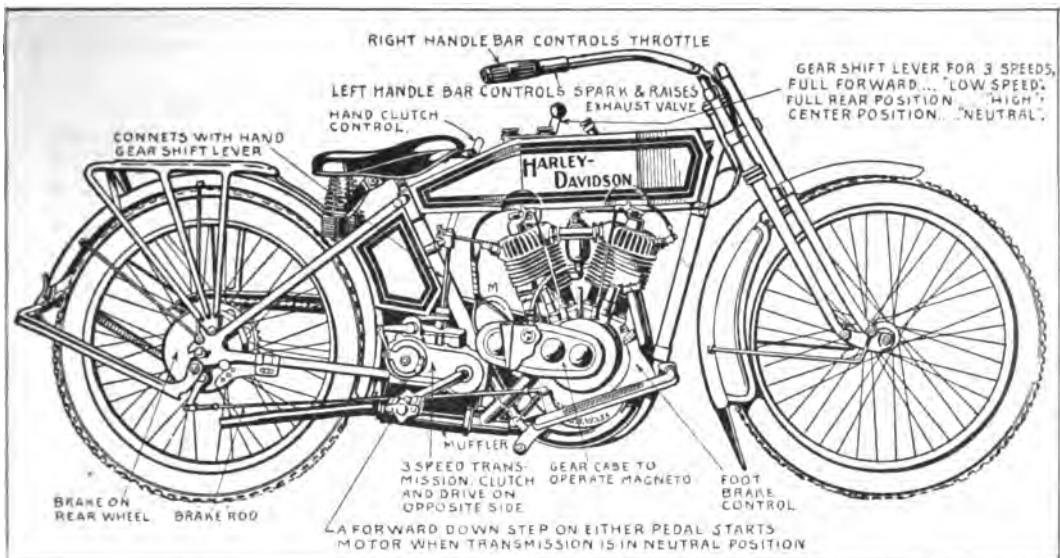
The H. D. three-speed, model 11F. The 1918 model 18F is similar. The gear box is mounted to the rear of engine on the frame. Note lettering on illustration. To start the three speed model engine, shift gears into "neutral" position and have clutch "in;" start engine by pedal. After engine is started release clutch. To start machine place gears in mesh, starting off on "low," gradually applying clutch. The Remy electric system below, is used on this type of machine and is then called model 18J.
